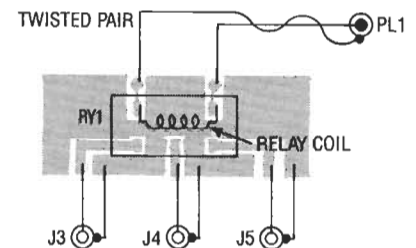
THE RELAY MODULE'S PC board uses a large ground plane; that helps to shield the relay from stray RF-signals that could cause interference.
